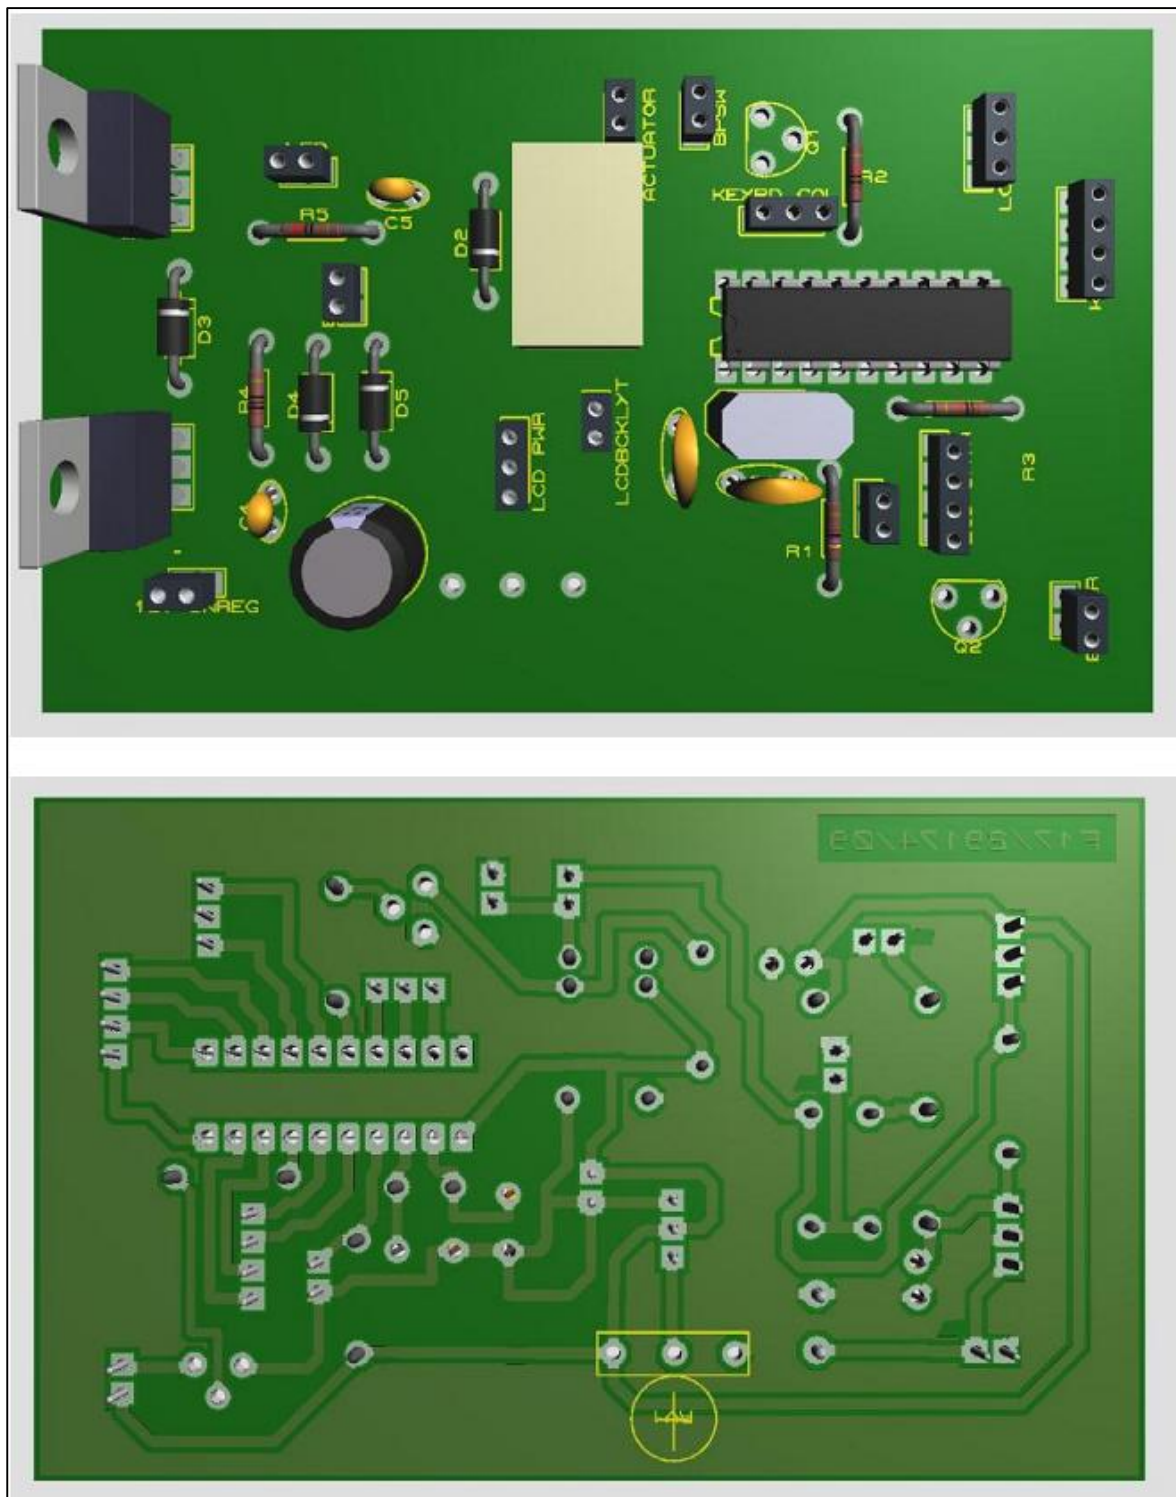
Software 3d view of the PCB board top and bottom surfaces
